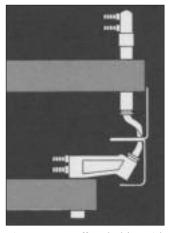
An offset holder with bent tip is used to weld close to the corner of a box section.
